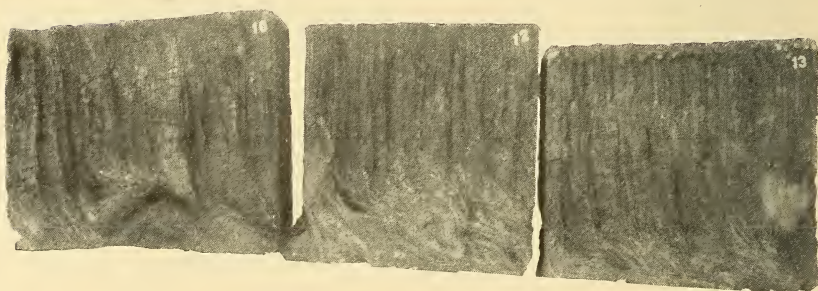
Oxyacetylene cuts on 10-inch steel showing irregularity of cut
